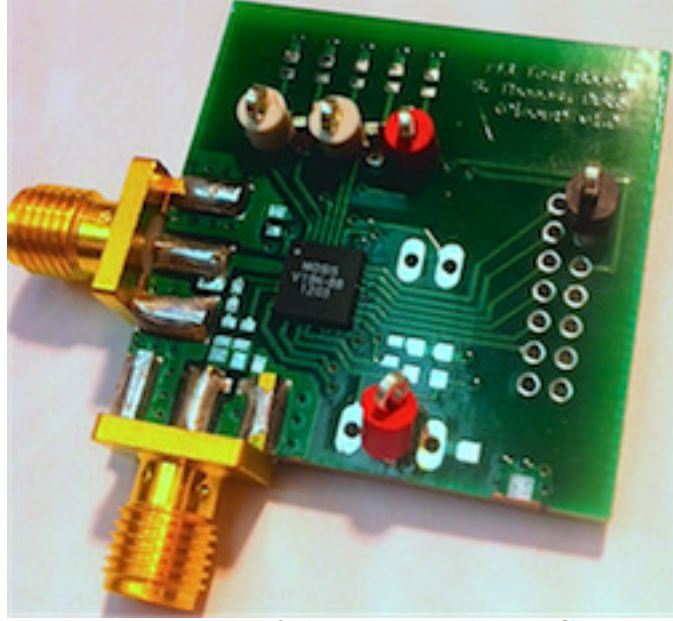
Photograph of chip mounted on PCB testing board
